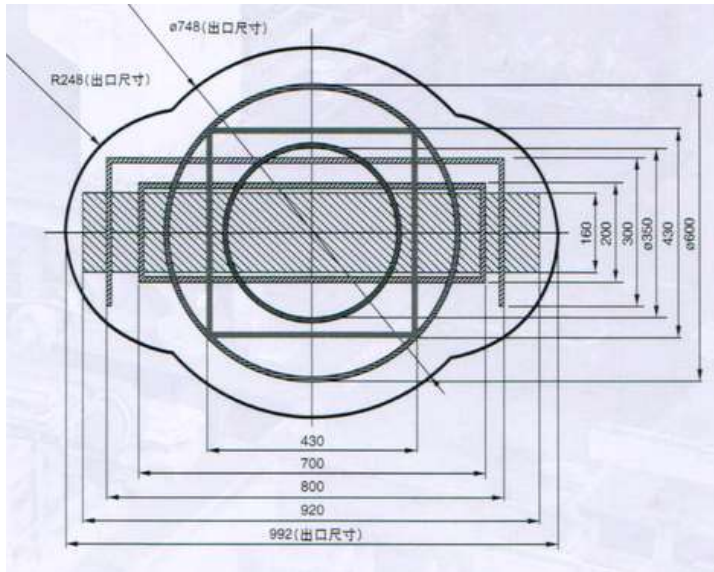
Limits for the extrusion press mouth (Horizon Aluminium, 2015)
